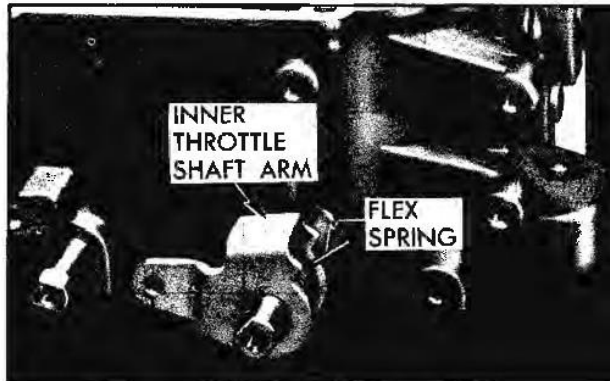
B-88 Inner Throttle Shaft Arm and Flex Spring Installed
